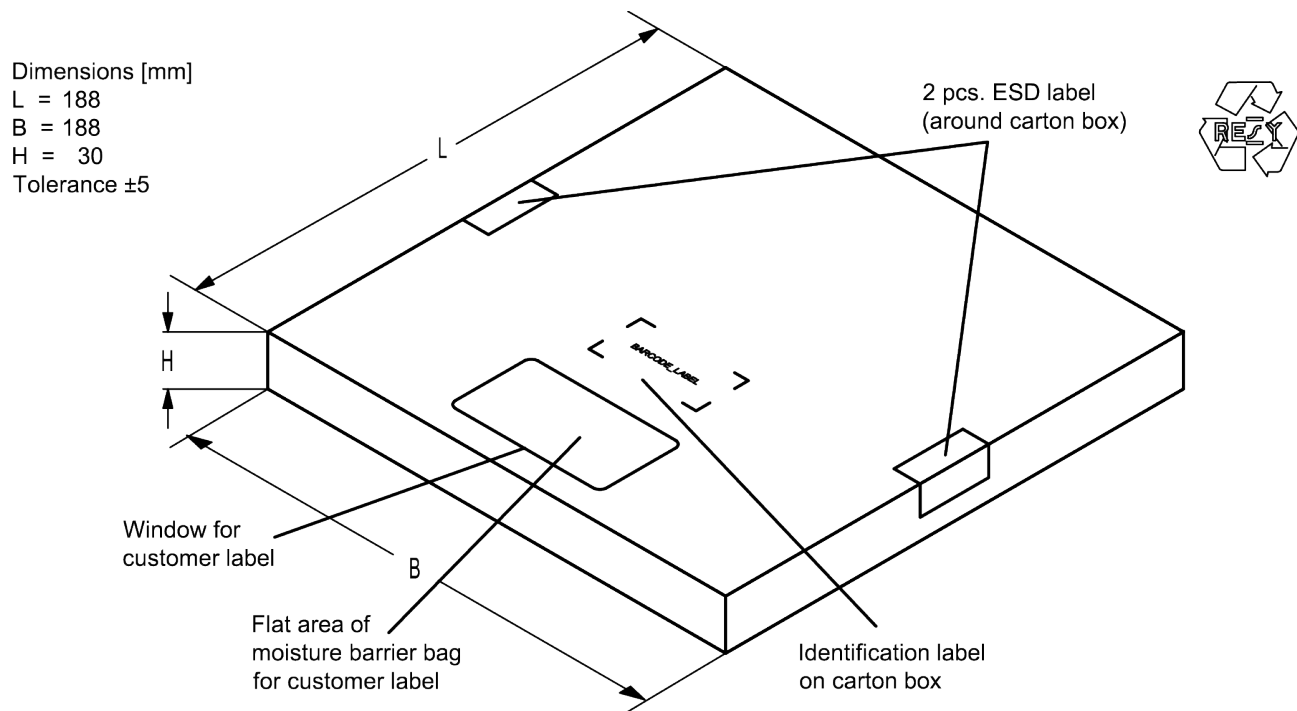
Drawing of folding box for reel with diameter of 180 mm.
